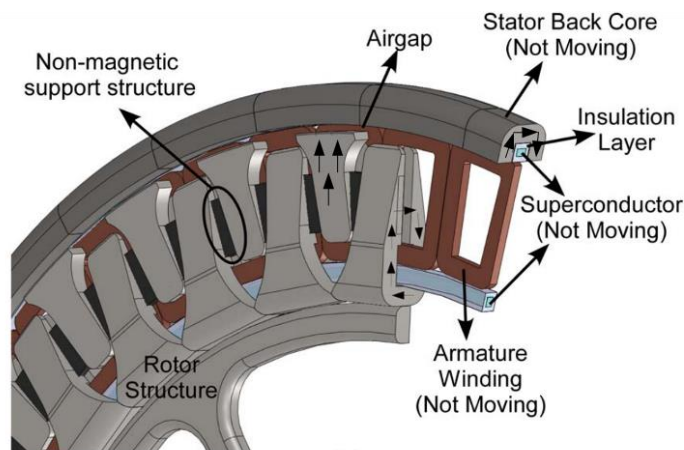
Axial-flux bipolar superconducting machine design [83].
